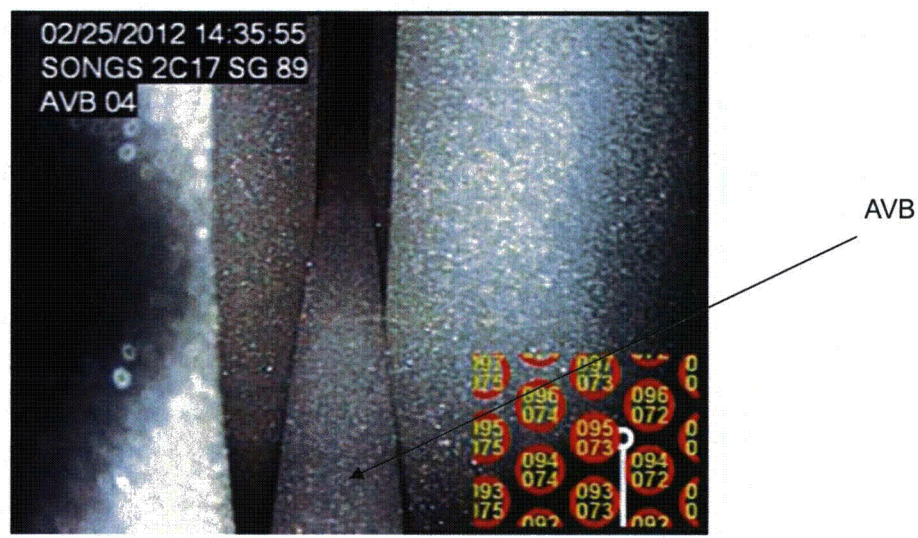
Tube Bundle Visual Inspection Image [Unit-2A]
